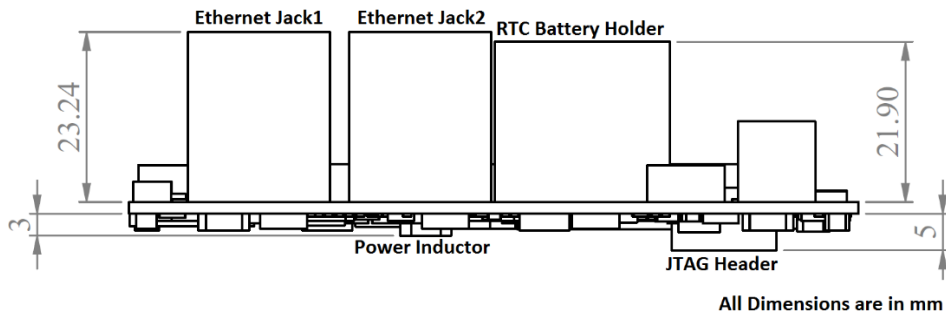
Mechanical dimension of i.MX 8M Mini or i.MX 8M Nano Carrier Board - Side View
